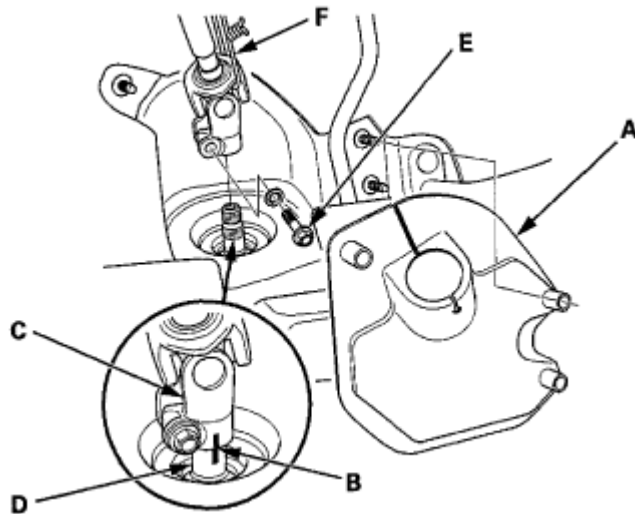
Identifying Steering Joint Cover, Mark On Steering Joint, Steering Gearbox Pinion Shaft And Steering Joint Bolt
